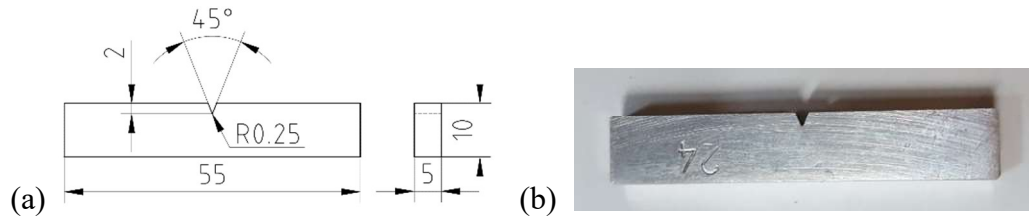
Geometry of the Charpy specimen and Charpy specimen
